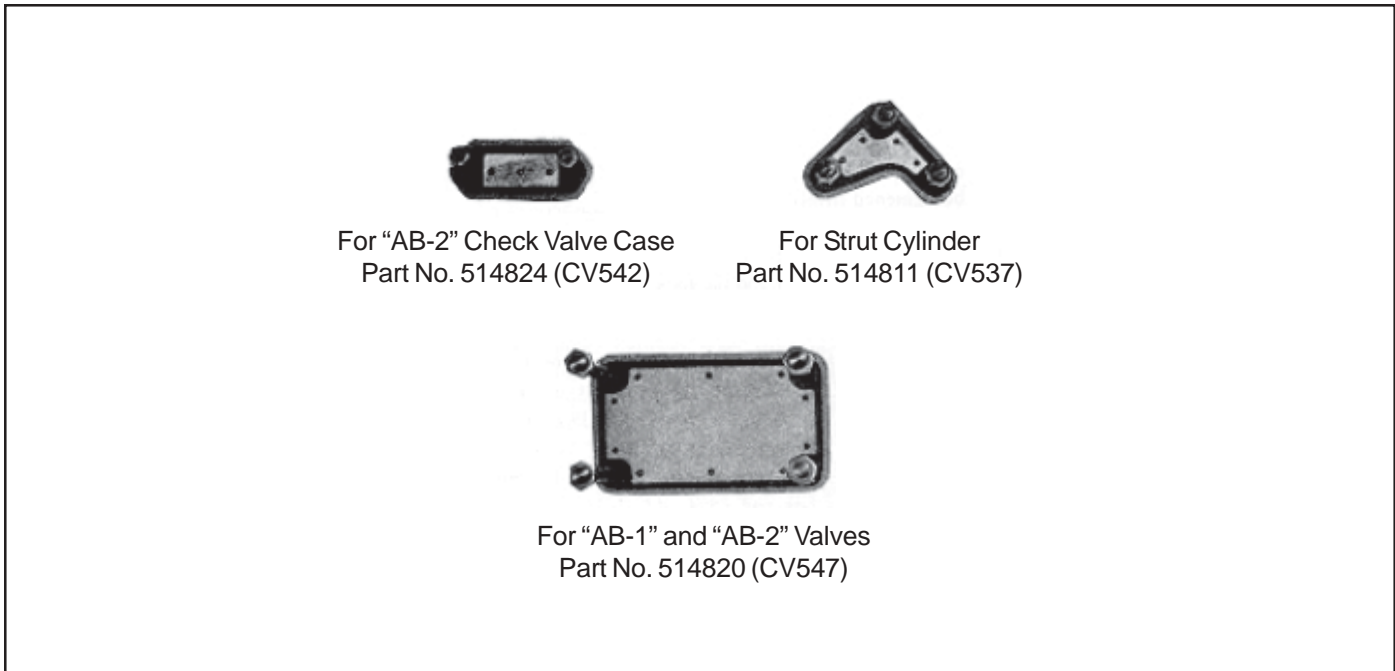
Shipping Covers for "AB" Empty and Load Equipment
